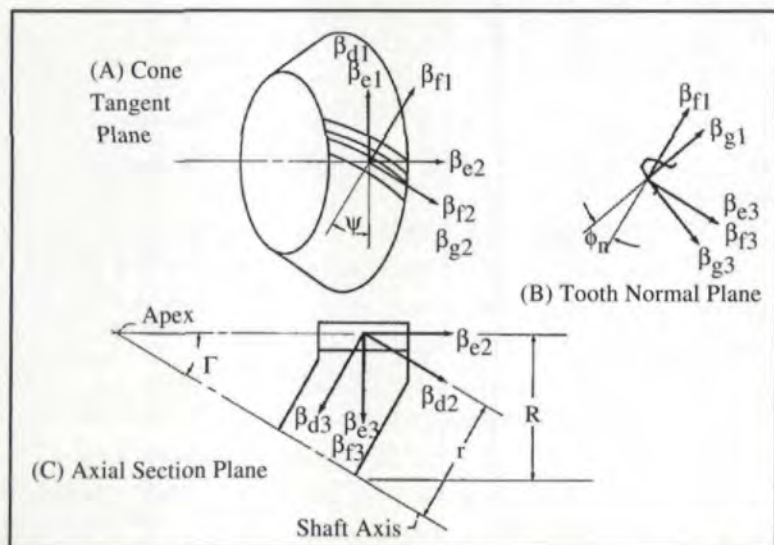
Spiral bevel gear tooth coordinate frames.
